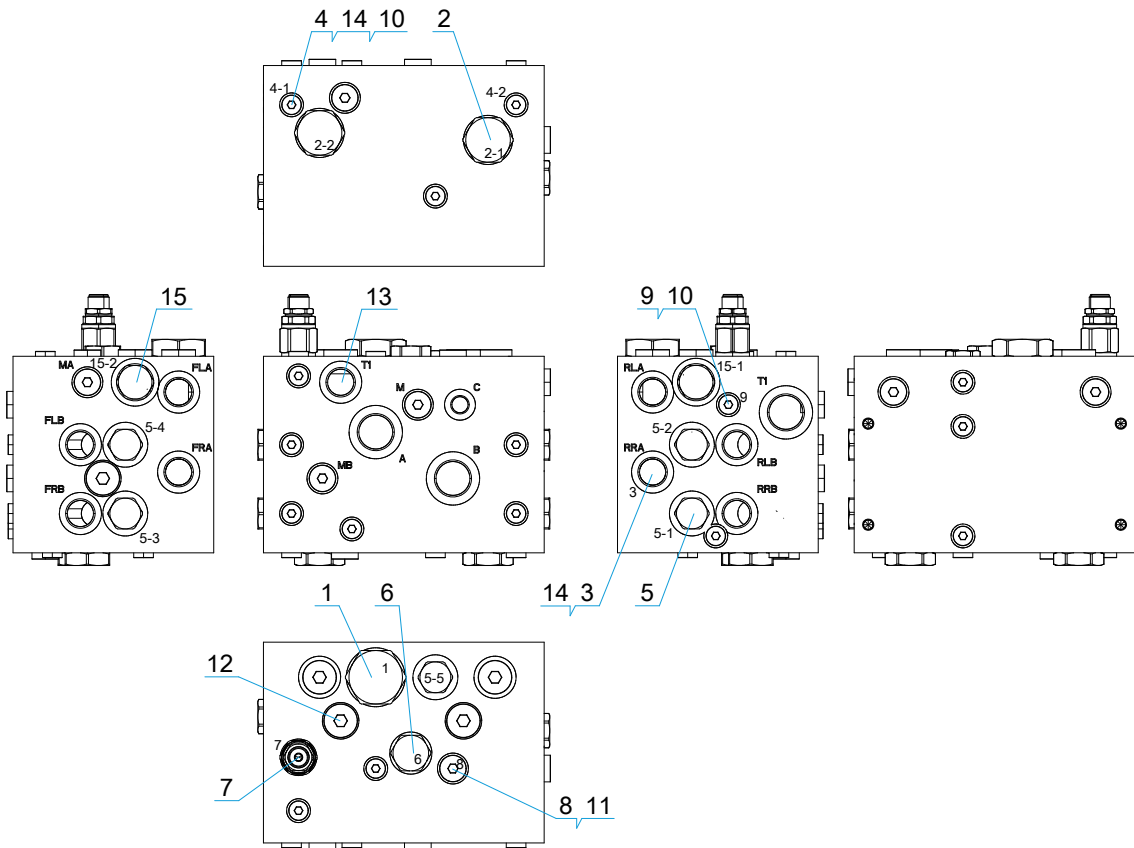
Travel Control Valve Manifold (PN.202040000153)
